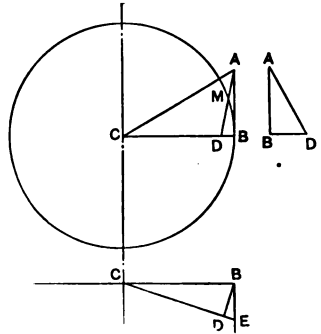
Deriving Formula for the Setting of Side Milling Cutter when Milling Teeth on Side
